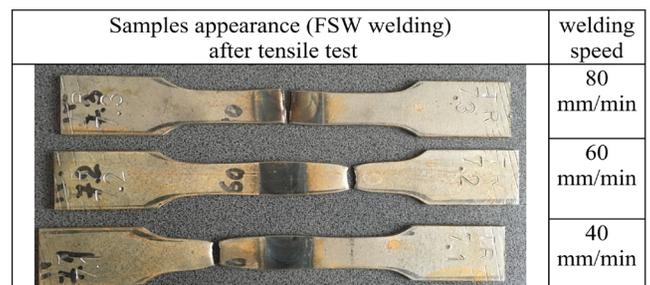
Samples appearance after tensile tests– FSW welding, DD13
